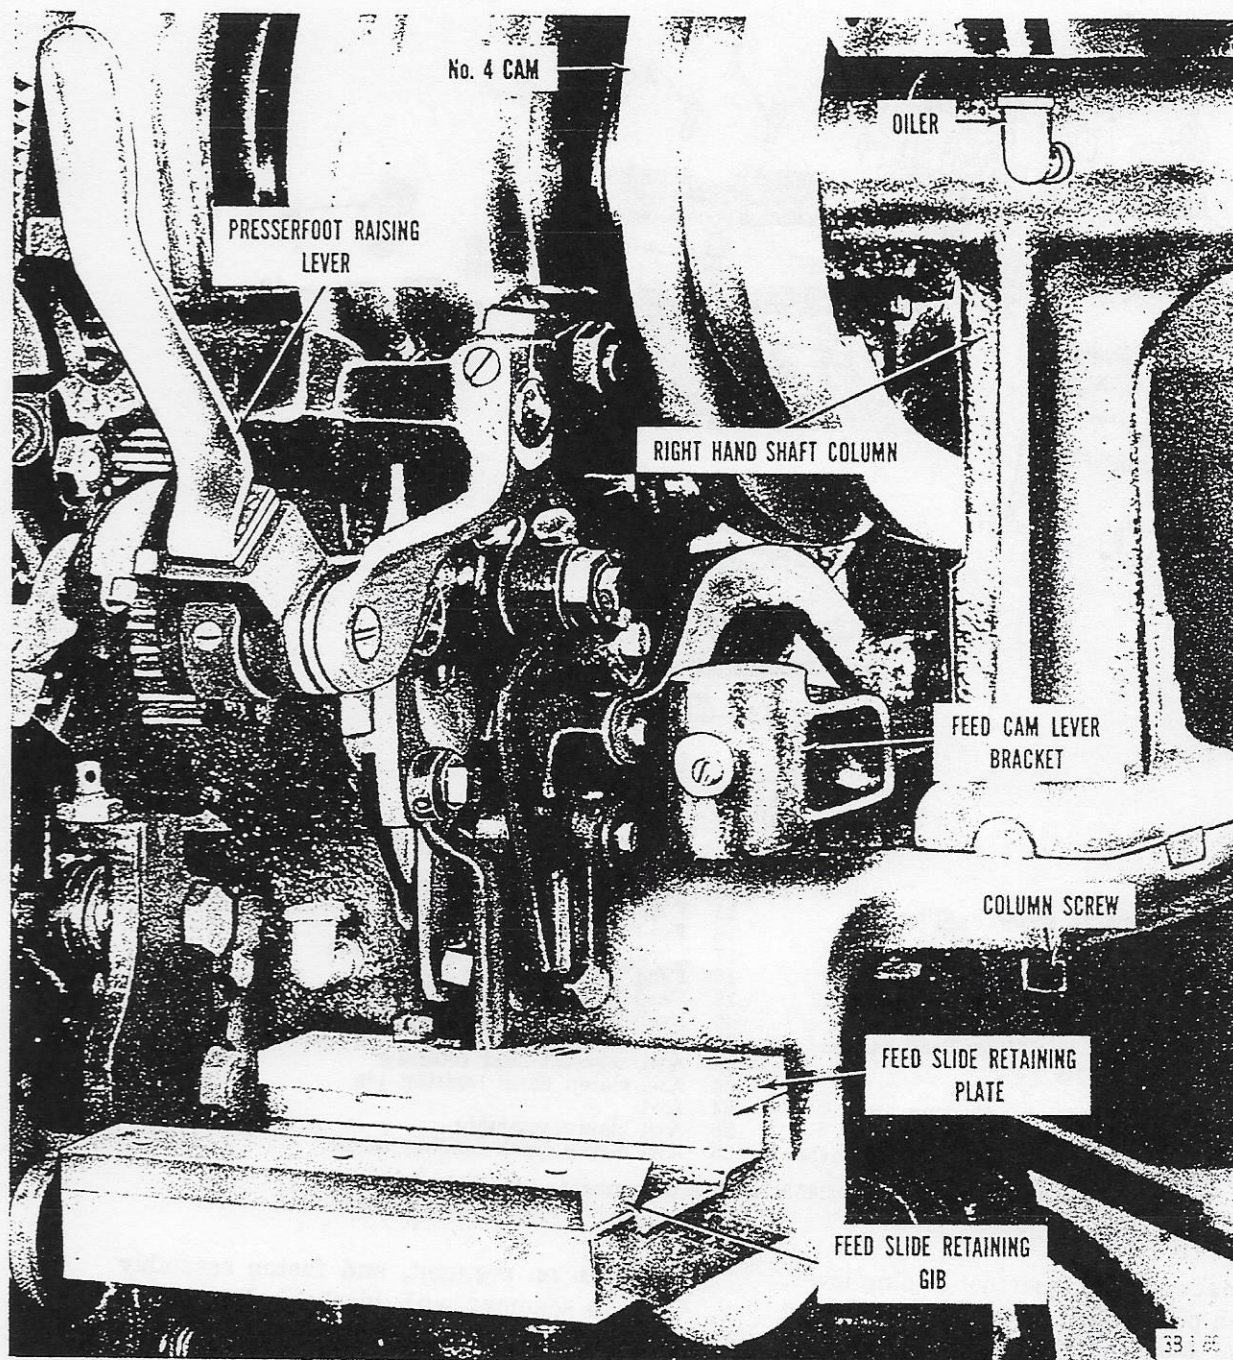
Feed cam lever bracket installed with right hand shaft column and No. 4 cam.
